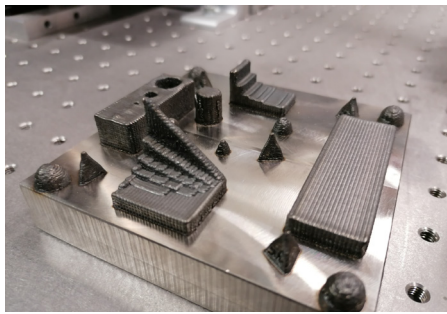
Test plate built for training the machine printing parameters based on primitive geometrical shapes. Built plate measures 10 x 10 cm.
